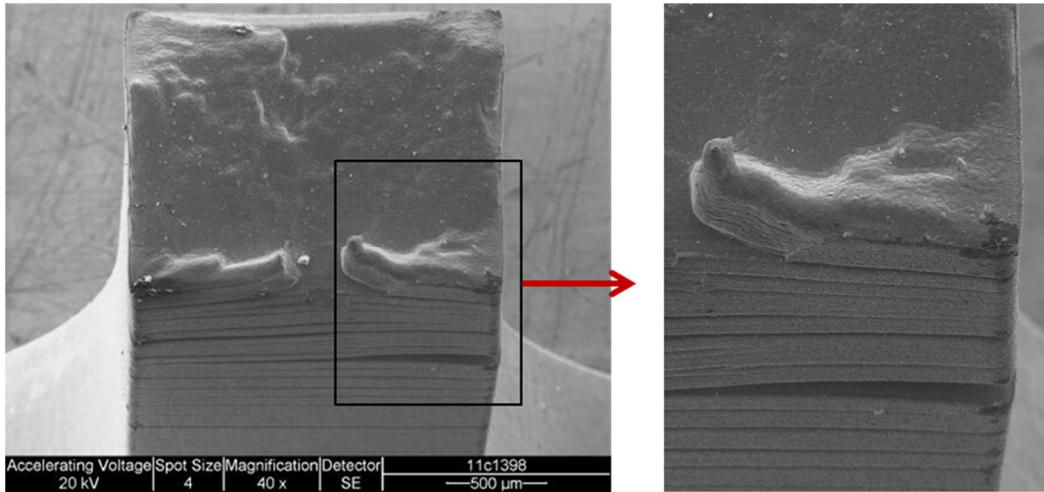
Post-test SEM photograph of the fracture surface of 12Cr ODS steel specimen after test in SCW at 550°C.
